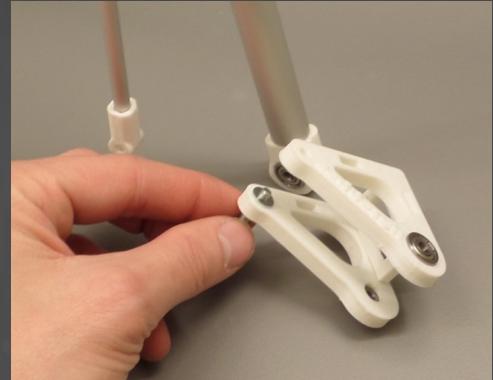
Use an M4 screw to mount the bracket. Remember washers.
